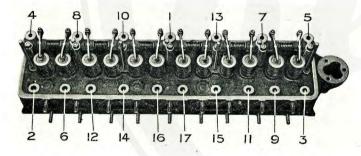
Numbers give the order in which Cylinder Head Nuts should be tightened.
